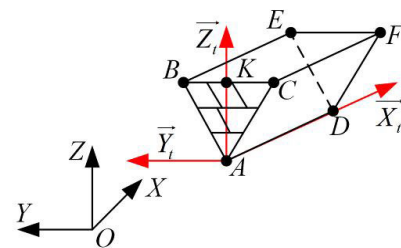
V-shaped weld cross section and coordinate system.
